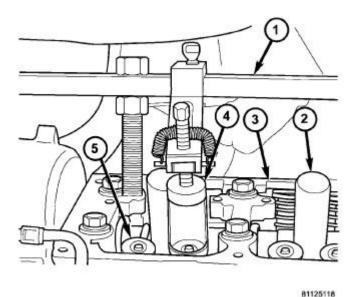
Removing/Installing Valve Spring Courtesy of CHRYSLER LLC
